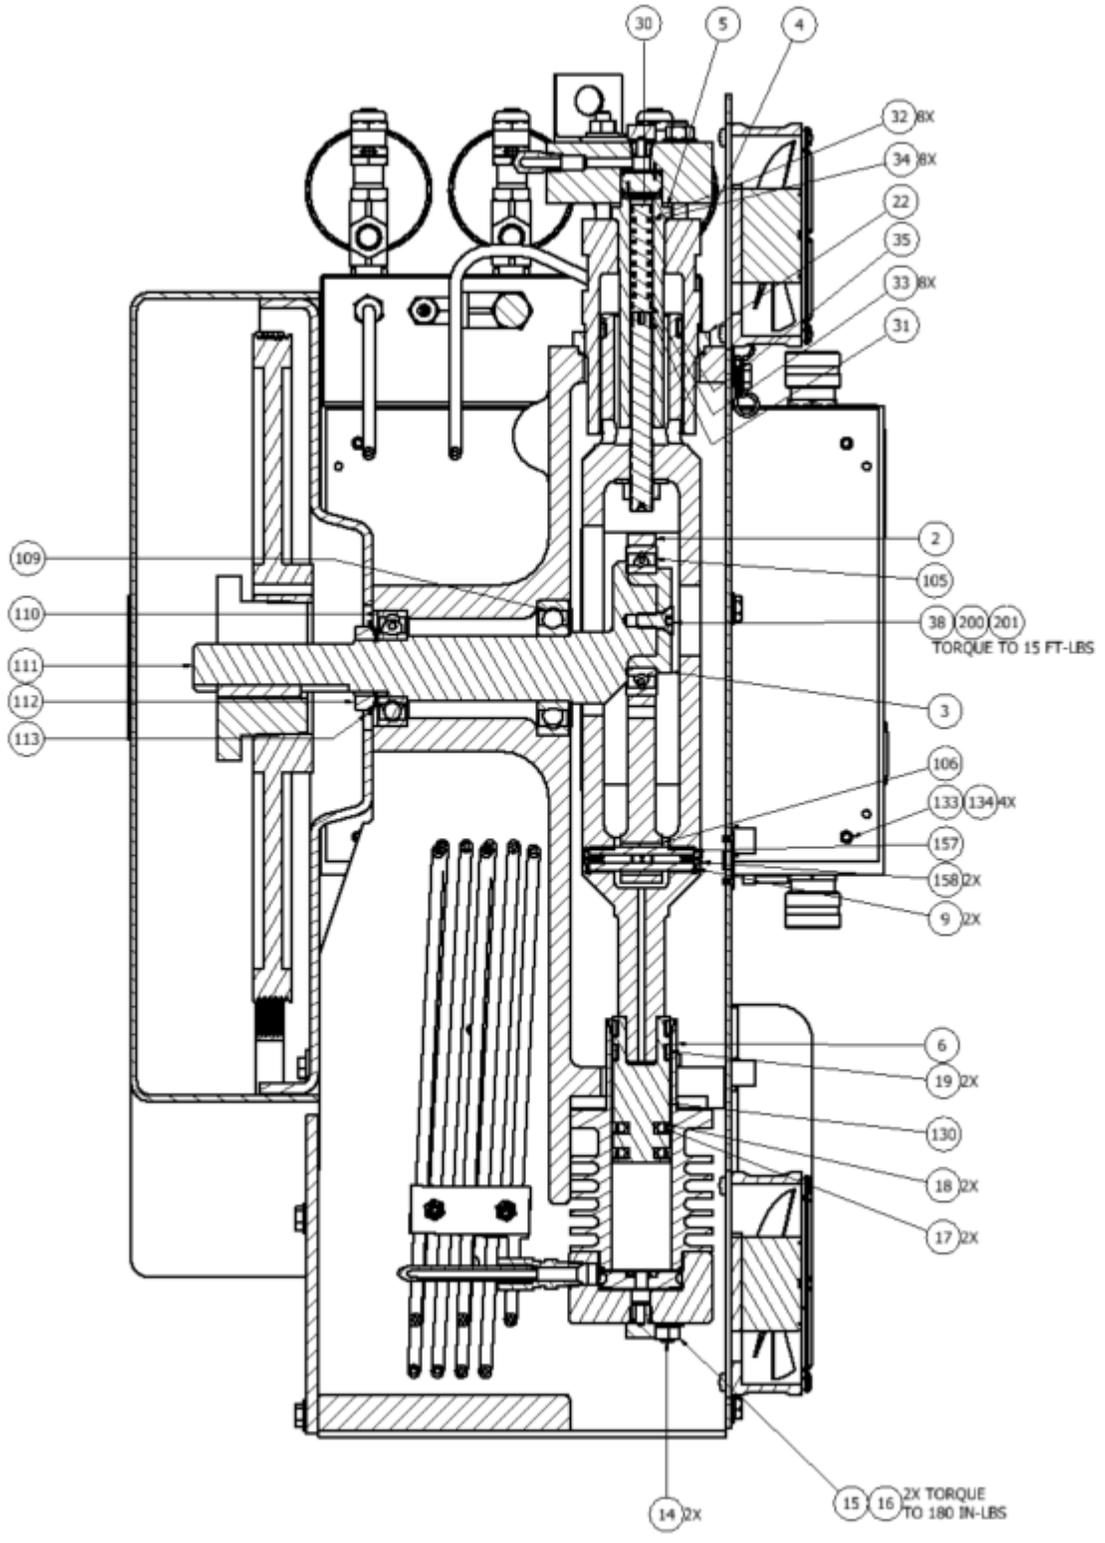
COMPRESSOR CROSS SECTION, PUMP DETAIL
